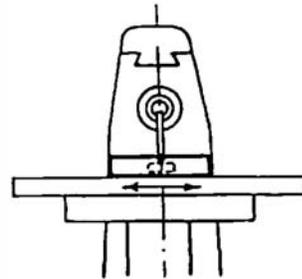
Checking Parallelism of T-slot with the Table]Movement
